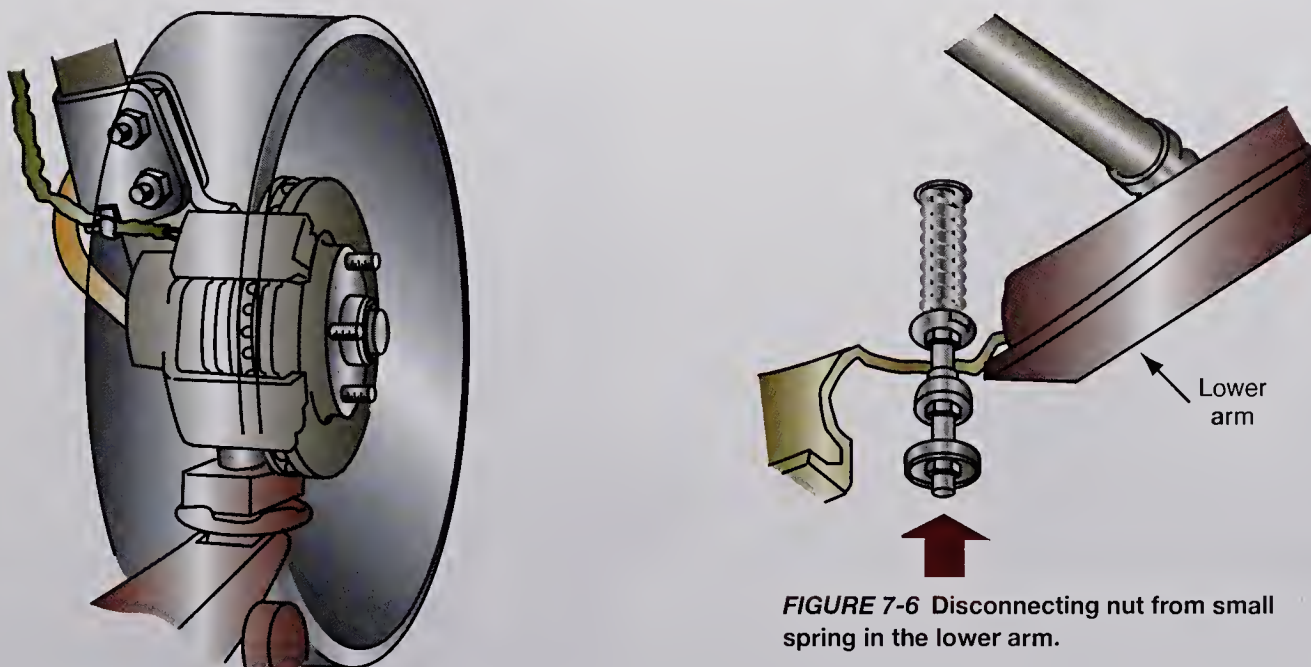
Disconnecting nut from small spring in the lower arm.
